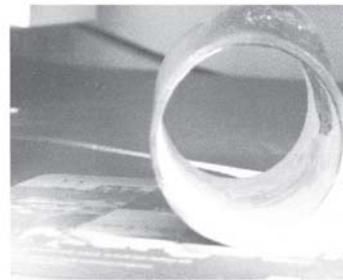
Magnetic iron oxide layer on a steam boiler tube after about 250000 h of operation
